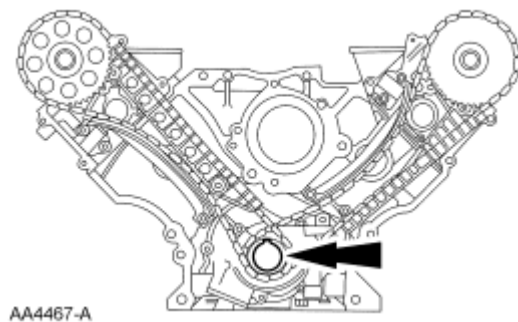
Crankshaft With Keyway At 12 O'clock Position
